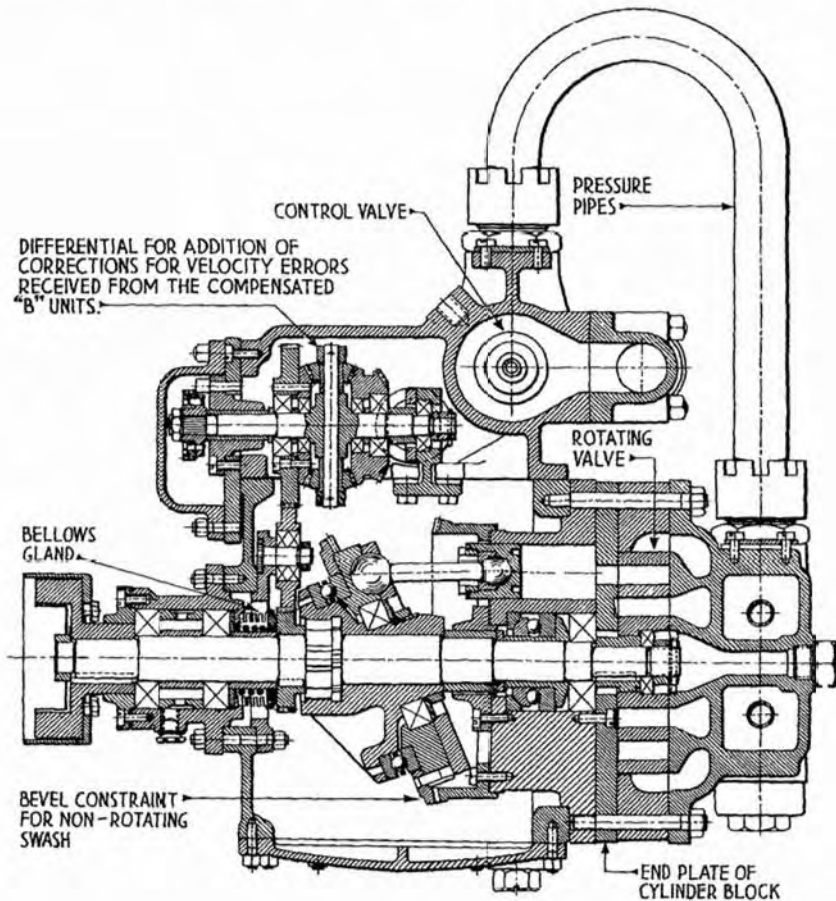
SECTION THROUGH "G" MOTOR OF A.R.L. POWER DRIVE ON 4 IN. MOUNTING. 1937
